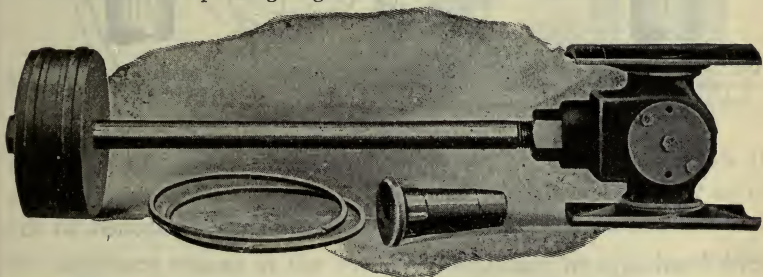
and 149.—Built up piston consisting of spider and bull ring with its packing rings, and follower ring.
